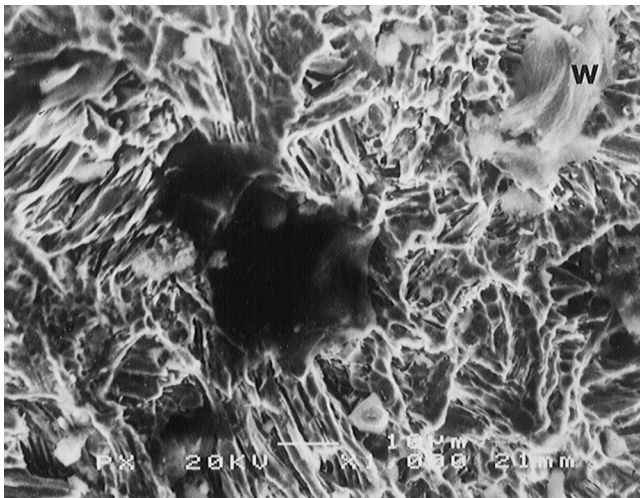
Same welding zone as shown in sample Code #3, 1000×.
